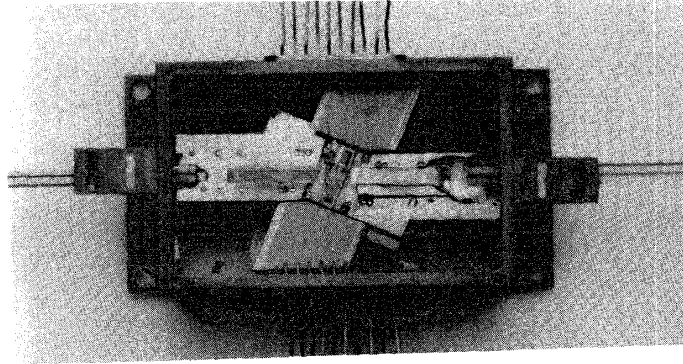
Inner view of the semiconductor optical amplifier array module assembled with YAG laser welding.
